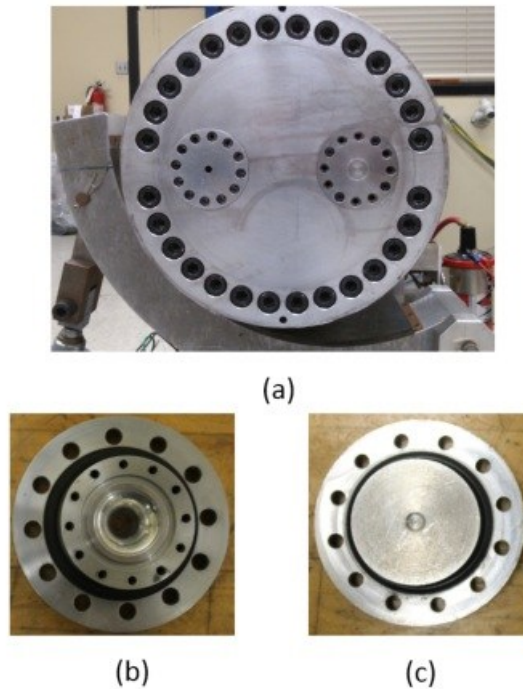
3 (a) Front view of the pre-chamber (b) type A nozzle insert (c) sealing blank
